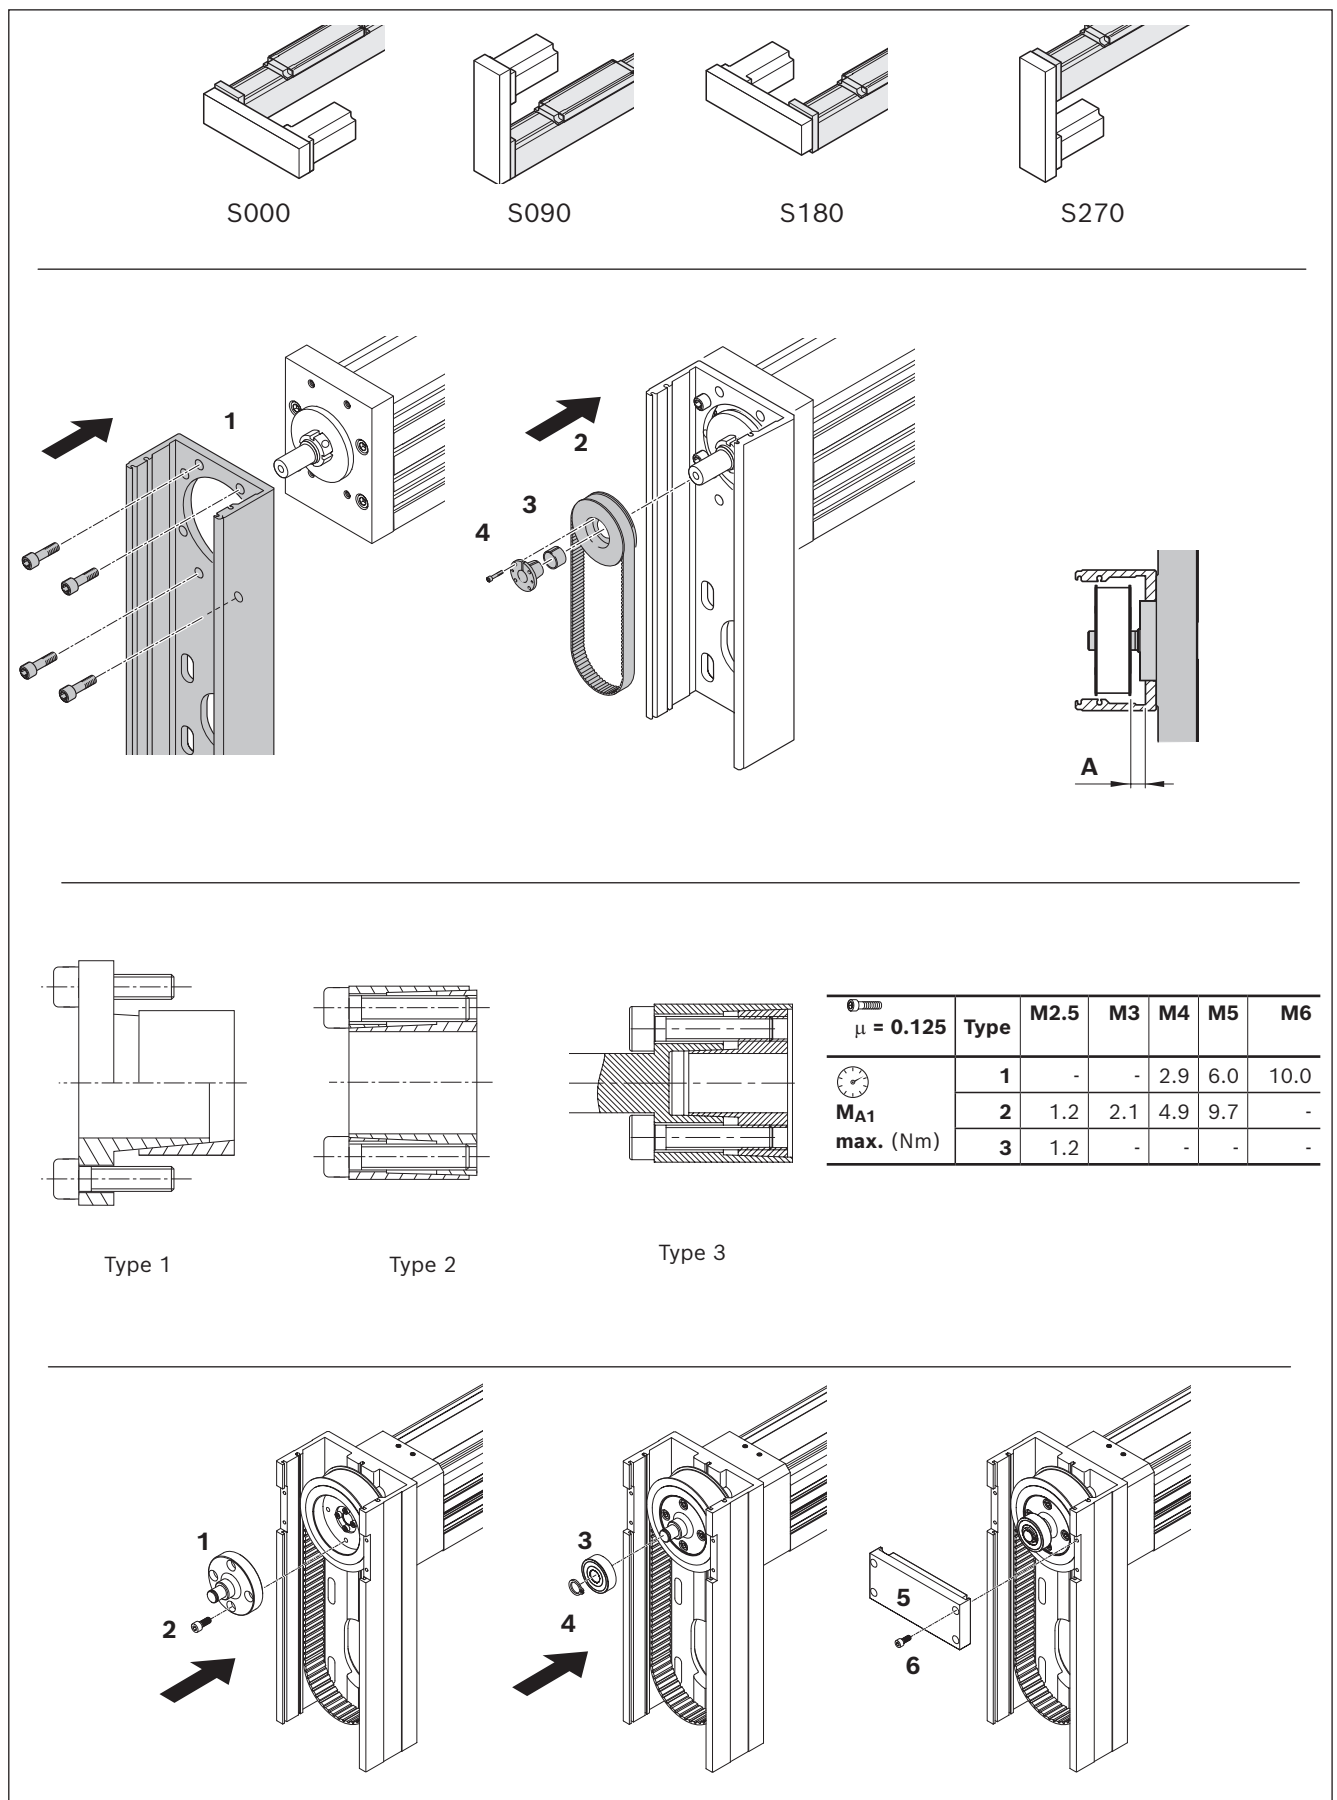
Mounting the timing belt side drive / mounting the first belt pulley / mounting the support bearing
